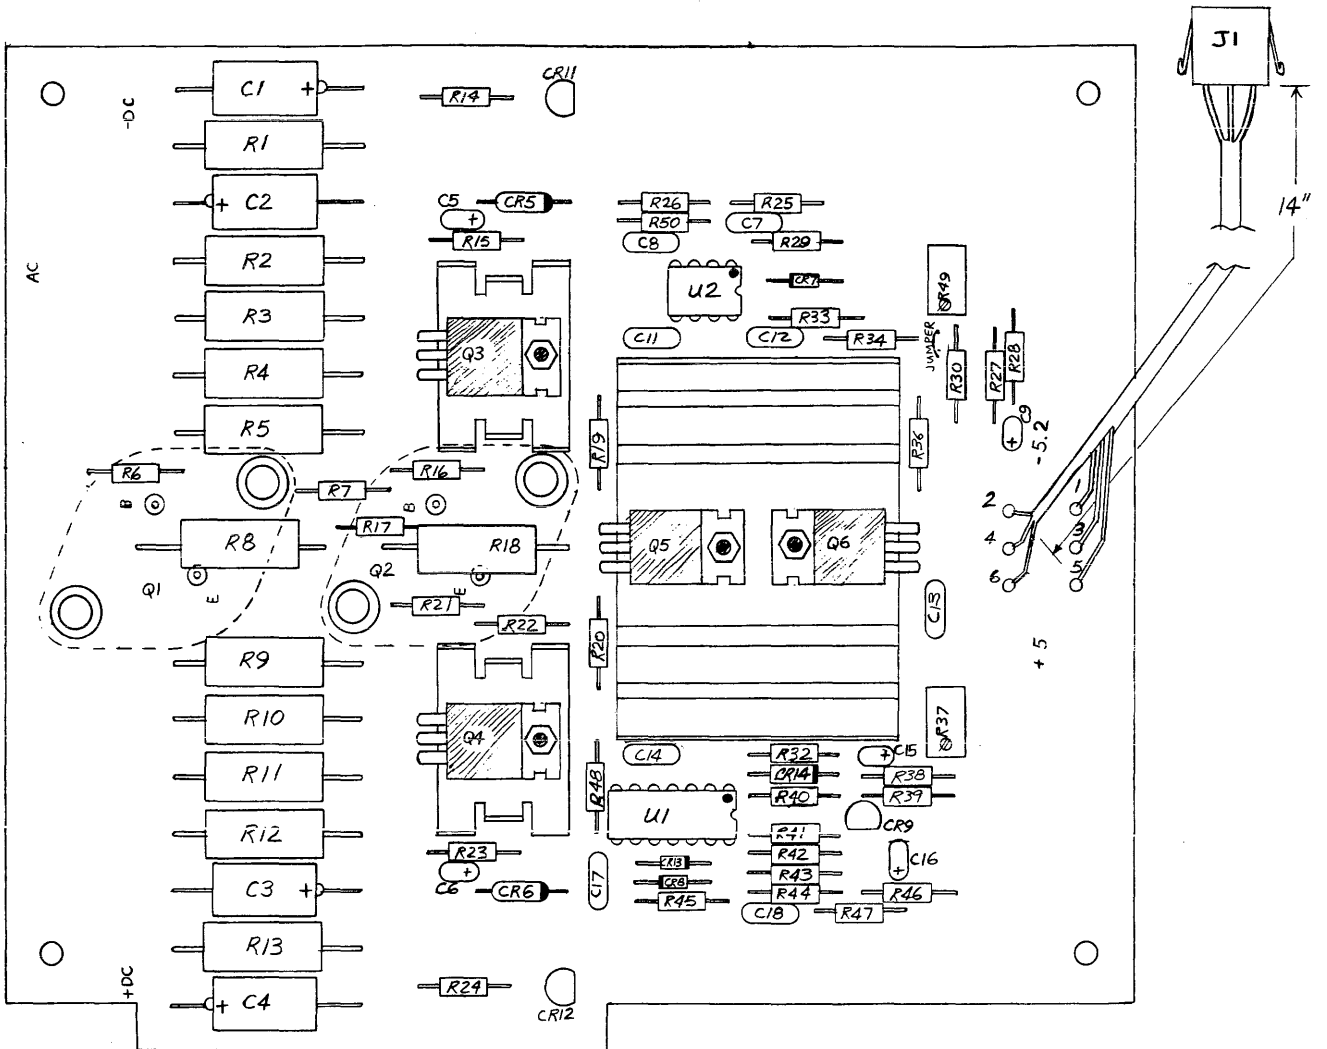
Power Supply Regulator Board Assembly Drawing
